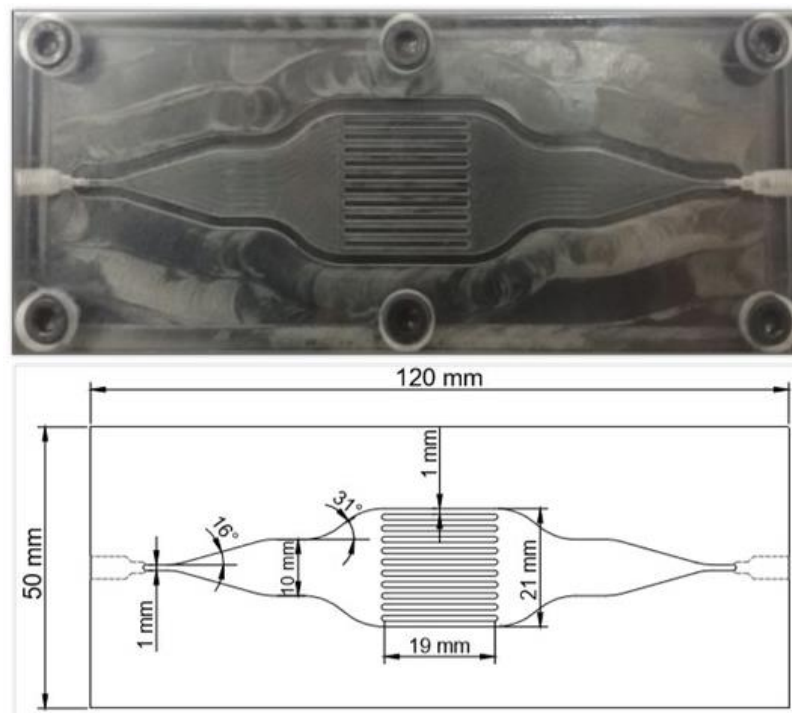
Top view and CAD drawing of the straight parallel channels micro-cell type-II.
